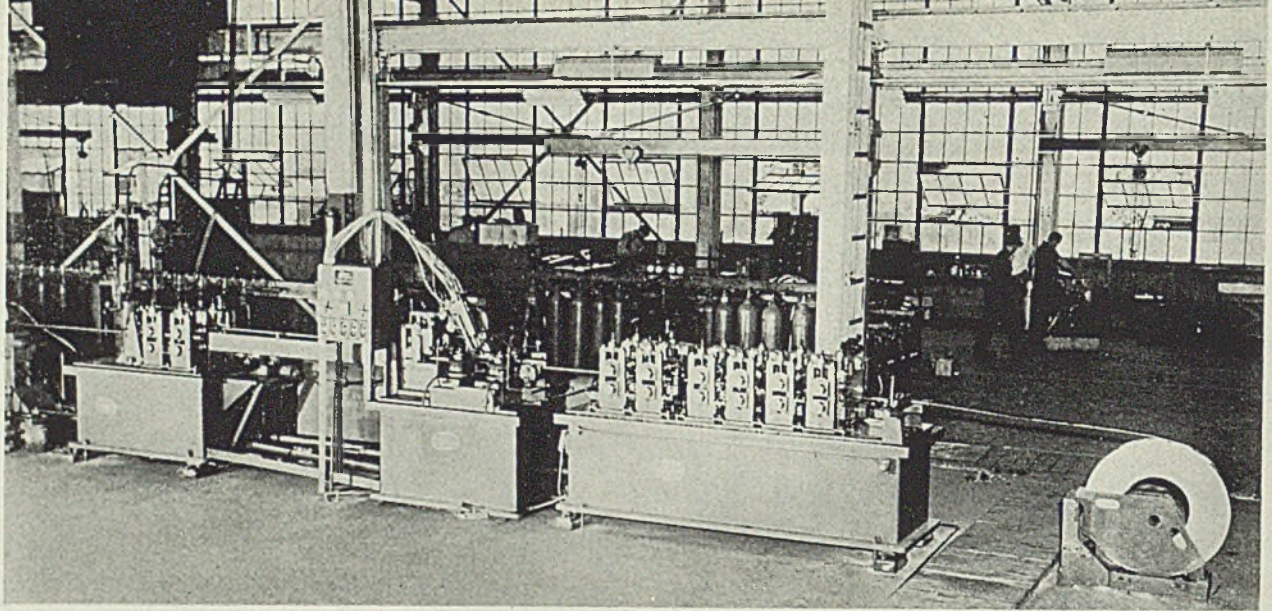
Flat steel skelp is fed into this machine, automatically formed into tubing and oxyacetylene welded at exceptionally high speeds
